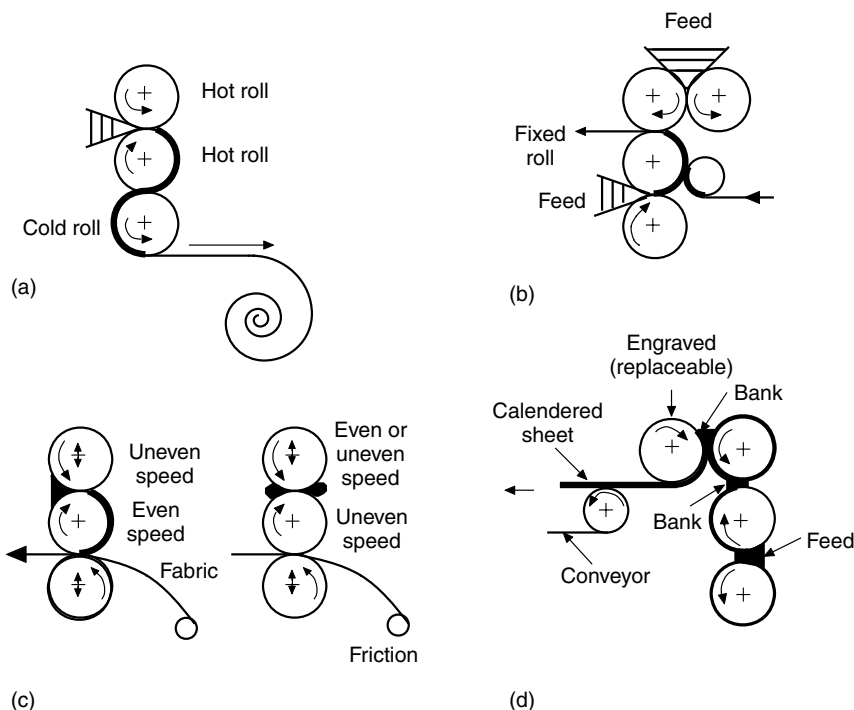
Typical arrangements of calender rolls: (a) single-ply sheeting; (b) double-ply sheeting; (c) applying rubber to fabrics; (d) profiling with four-roll engraving cylinder.
